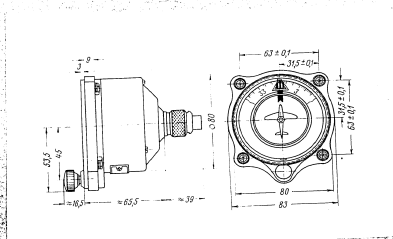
Overall and Installation Dimensions of BK-43 Indicator
